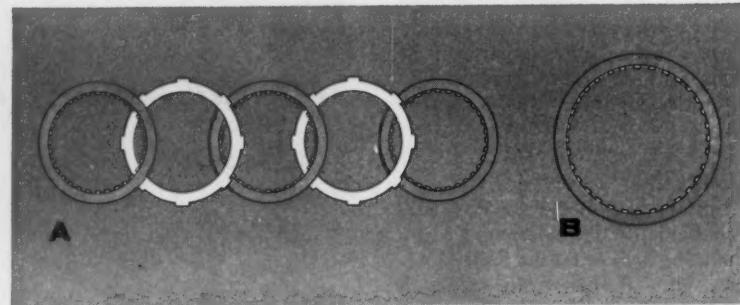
Clutch "A" consists of three faced plates (six surfaces) with facing dimensions of 4" I.D. and 5" O.D. Clutch "B" has one plate (2 surfaces) with facing dimensions of 6" I.D. and 7½" O.D. With equal coefficient of friction and closing pressure in both cases, Clutch "B" has greater torque capacity than Clutch "A."
